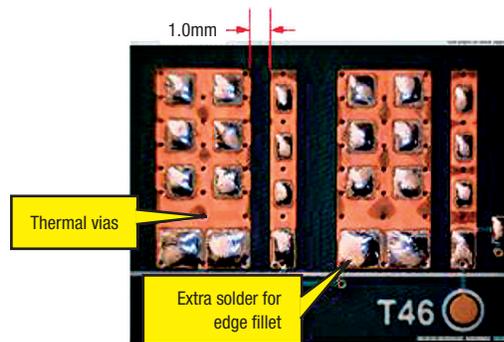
TPSM831D31 PCB bottom pads – all rectangles.
